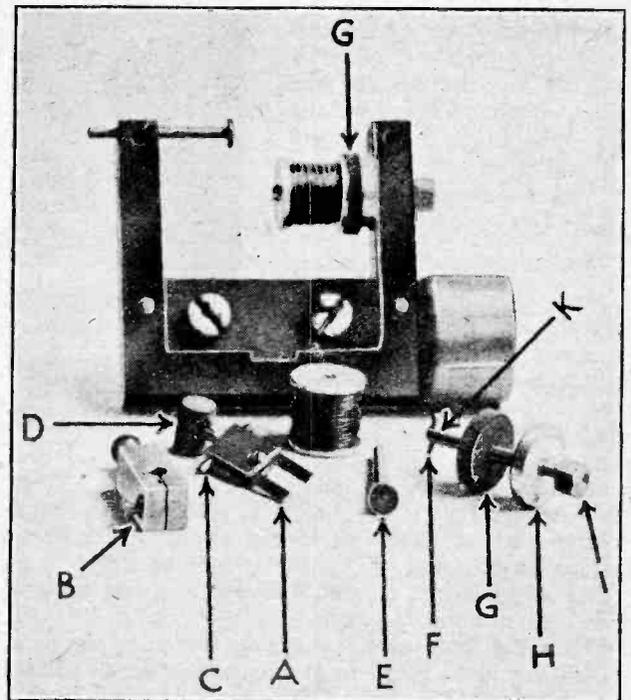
Armature and one pole-piece dismantled to show component parts.
